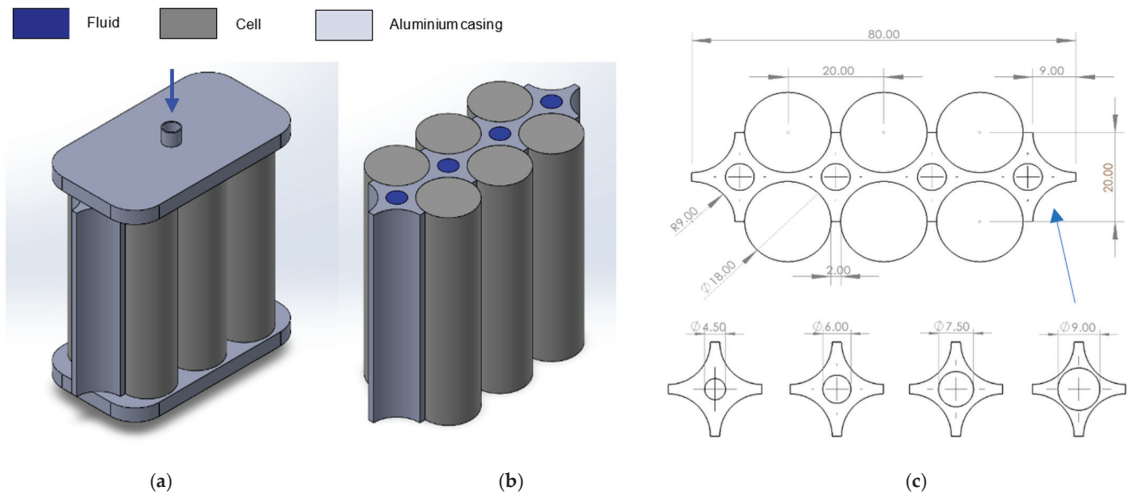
VFD views and dimensions (mm): (a) isometric view of VFD with fluid domain and inlet; (b) isometric view of simplified VFD; (c) battery pack top view and arrow indicating the section of the design that will have channels of varying diameters.
